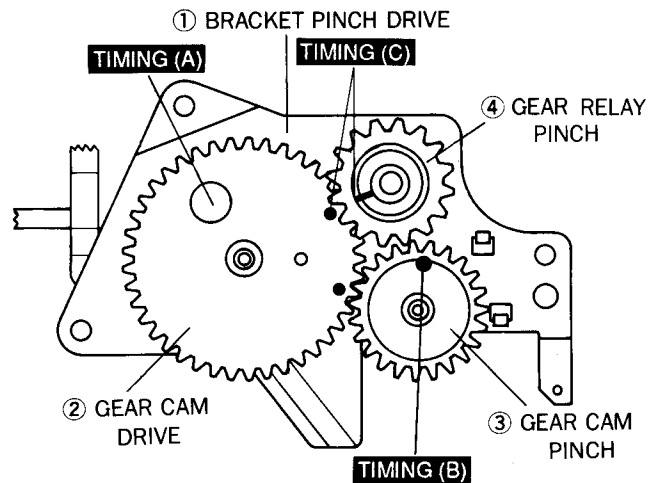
Timing of Gear Cam Drive, Gear Cam Pinch & Gear Relay Pinch
